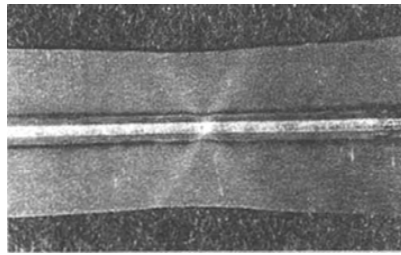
Appearance of fracture in tensile test parallel to weld bead (AKS-1, 4 kW, 4 m/min)
